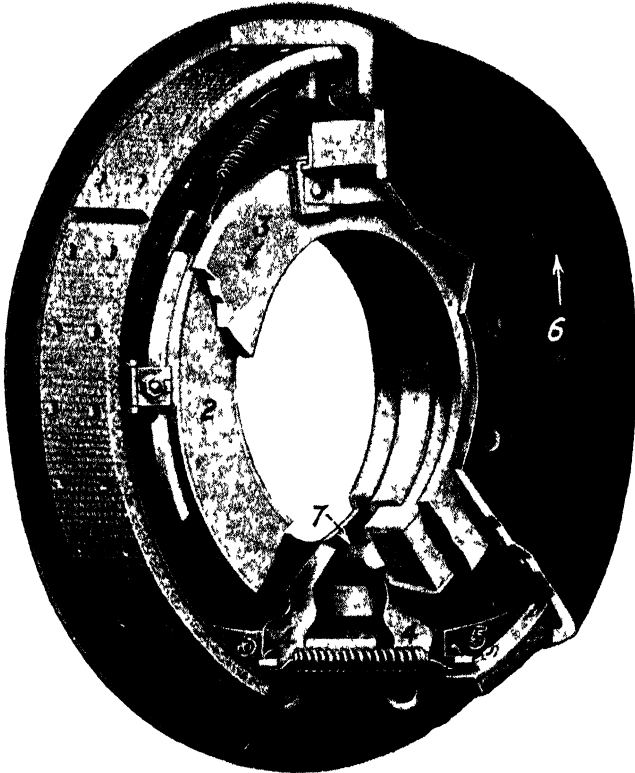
CUTAWAY VIEW OF WARNER ELECTRIC BRAKE.
